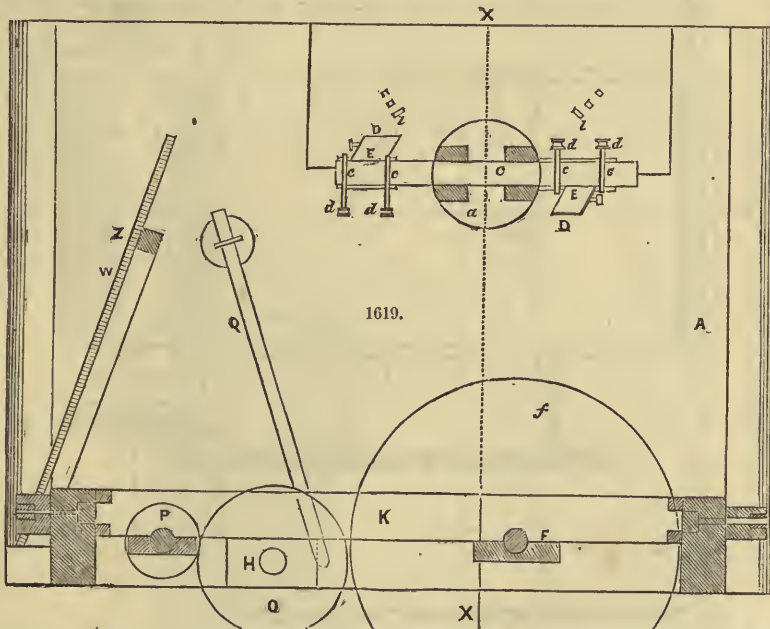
is an elevated section of the machine at the line XX of Fig. 1619, which is a horizontal view with the friction wheels removed. The same letters refer to like parts on both the figures.
